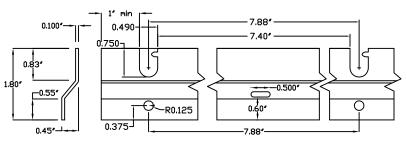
EXTRUDED 6063T5 ALUMINUM LOUVER
